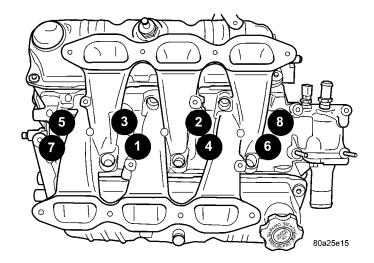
LOWER MANIFOLD TIGHTENING SEQUENCE
